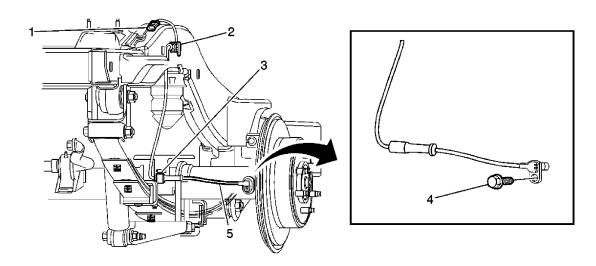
Wheel Speed Sensor Replacement - Rear Courtesy of GENERAL MOTORS CORP.
